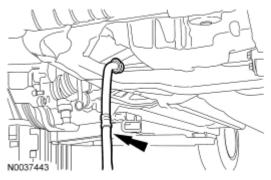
Locating Power Steering Pressure (PSP) Tube Courtesy of FORD MOTOR CO.
